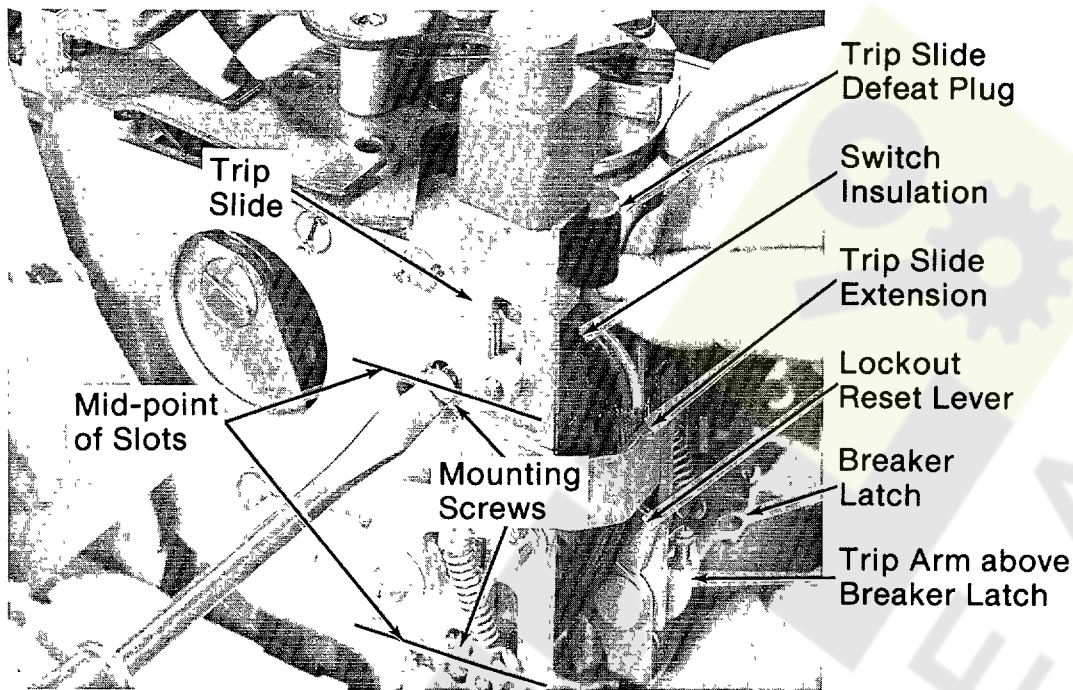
Holding device while installing mounting screws or adjusting unit position. Trip arm must be above breaker latch.
